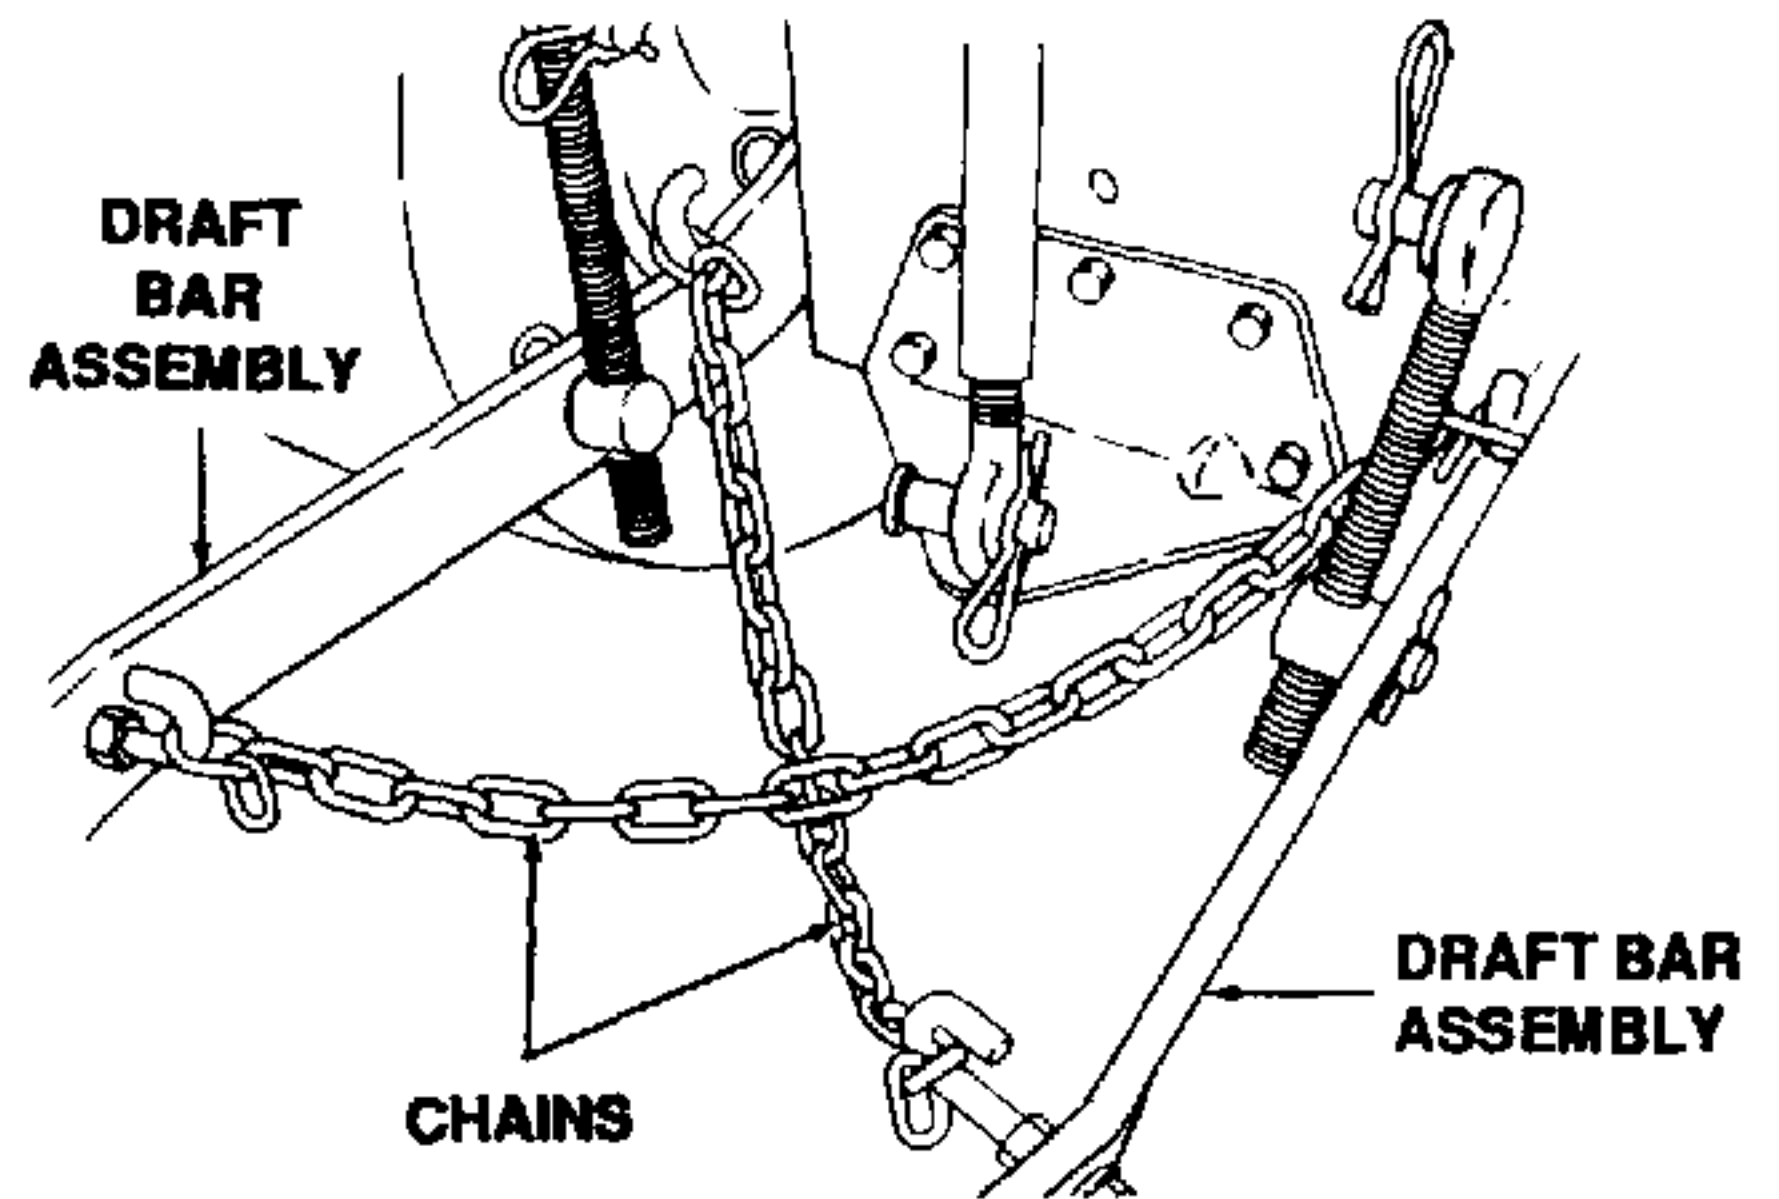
Attaching Chains to Draft Bar Assemblies.
